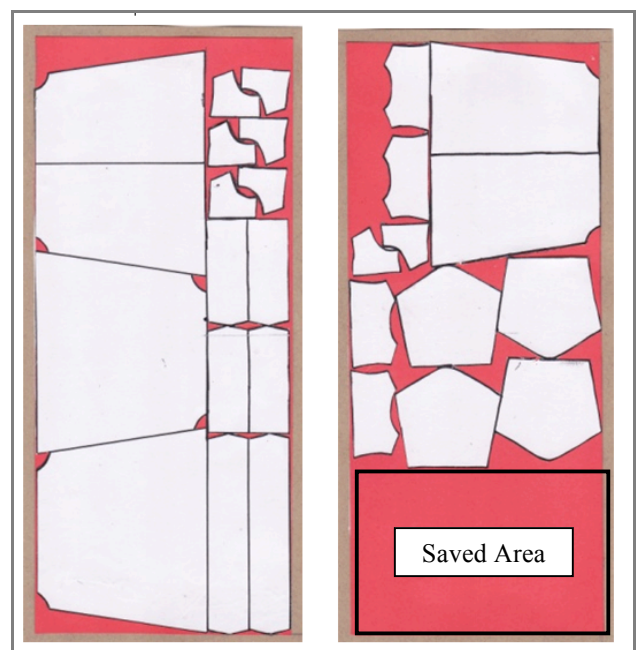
LAYING OUT PATTERN PIECES (IMPROVED).
